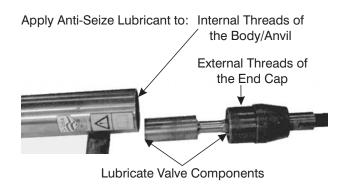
Prepare Tail Assembly and Body Anvil for Assembly.
